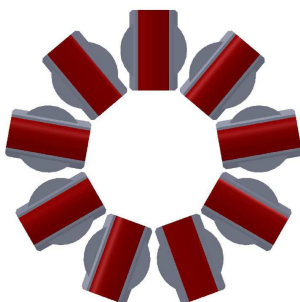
Trajectory view showing the 9 piston geometry design of the roller piston bearing mechanism.
